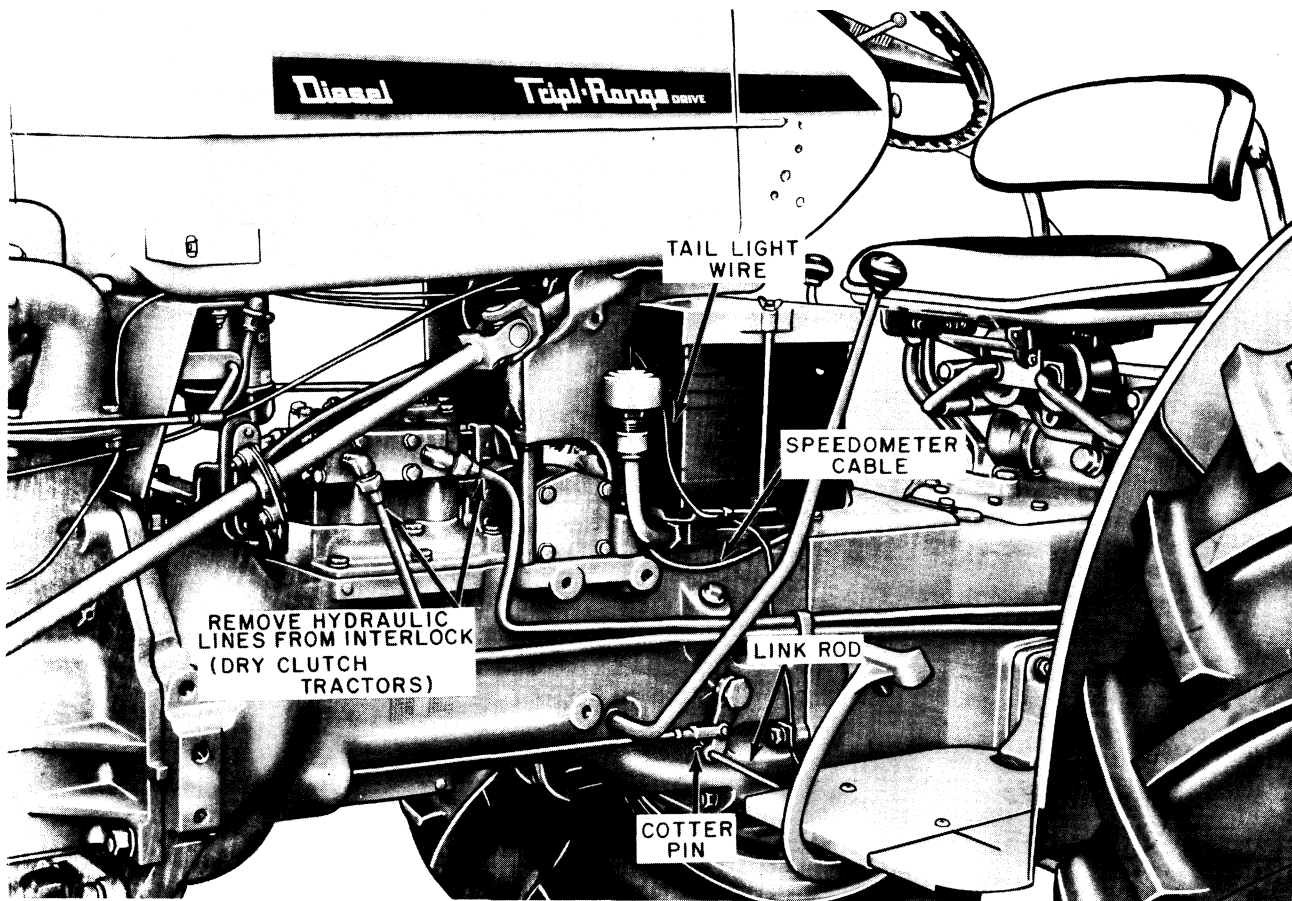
Preparing Tractor for Splitting at Rear of Torque Tube - L.H. View
